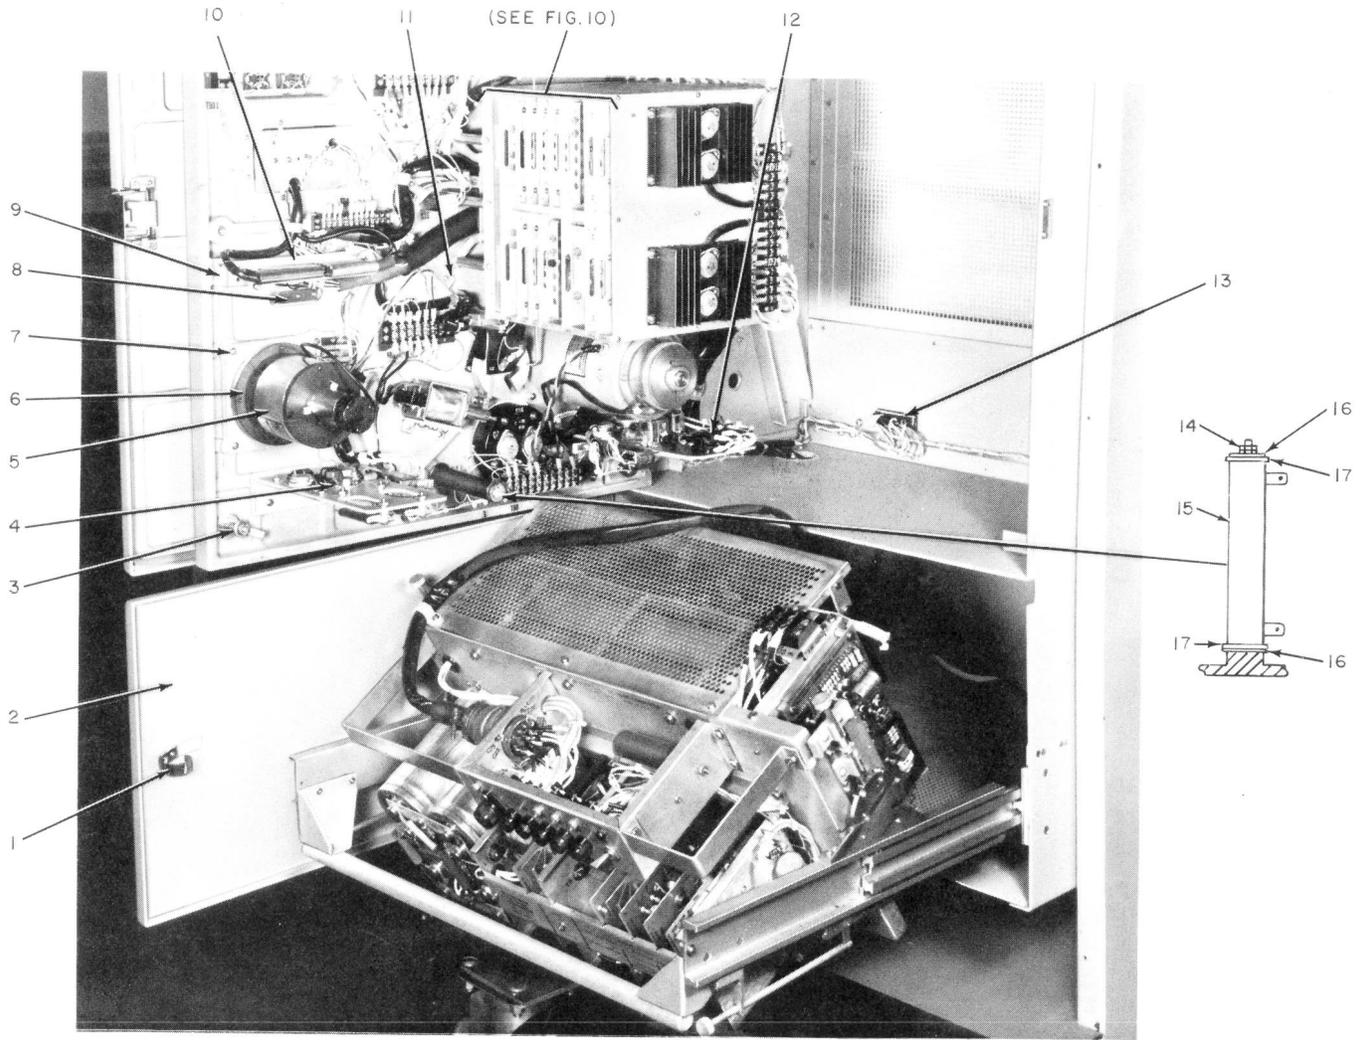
Partial Rear View of Tape Transport Lower Part (Shown With the KS-21104 Converter Installed) (Sheet 1 of 2)
